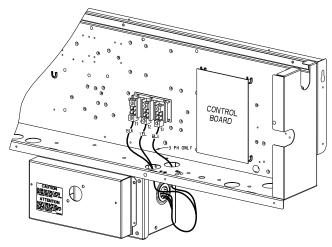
Location of HACR Circuit Breaker Enclosure
